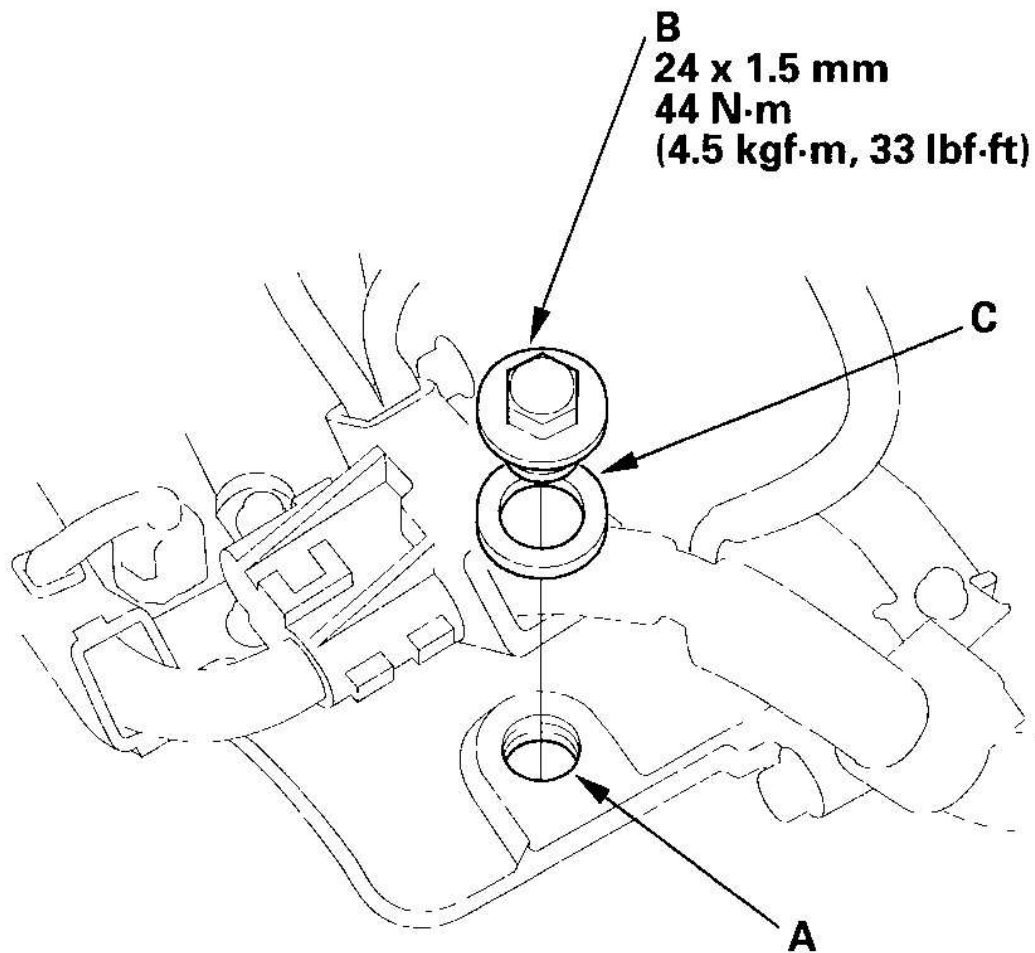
Removing ATF Filler Bolt And Drain Plug
